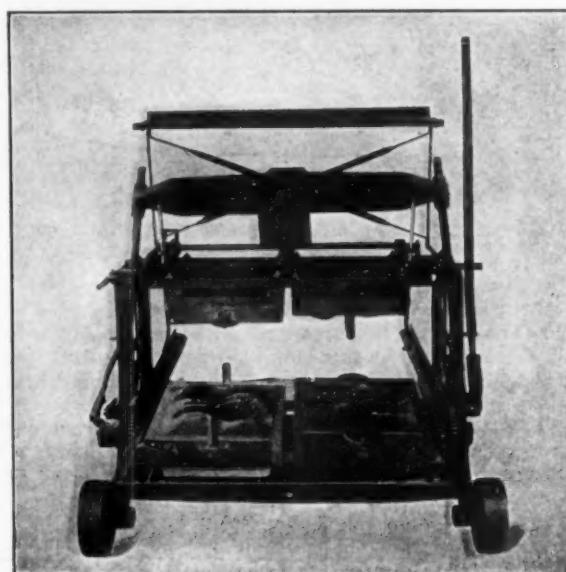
shows the clamps released, the sliding table lowered, the pattern drawn from the cope and drag halves of the mould.
